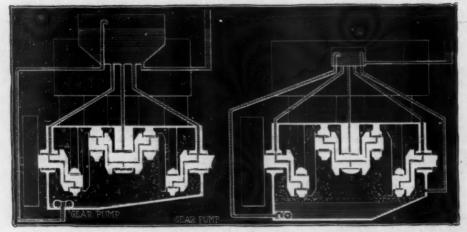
DIRECT GRAVITY FEED TO ALL BEARINGS CIRCULATED BY GEAR PUMP
